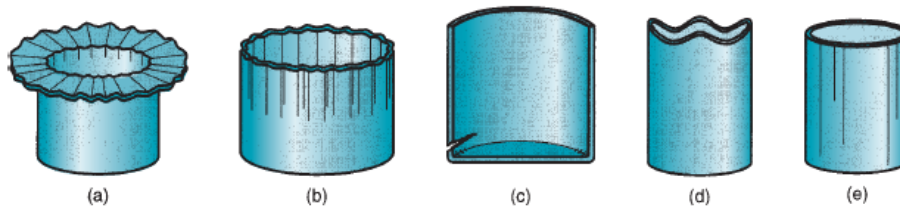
Common defects in drawn parts: (a) wrinkling can occur either in the flange or (b) in the wall, (c) tearing, (d) earing, and (e) surface scratches.
